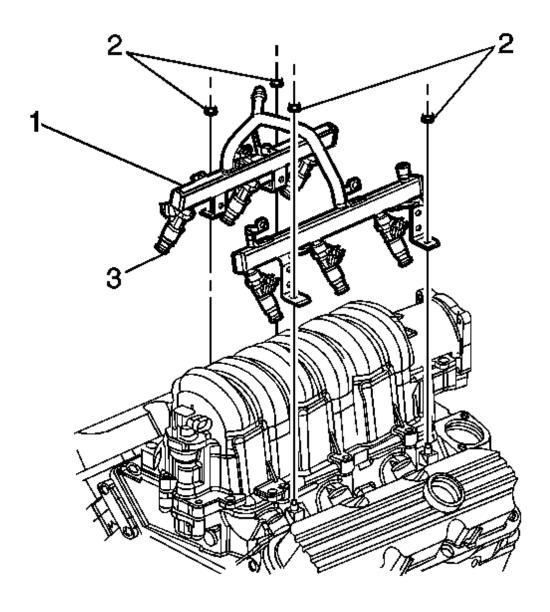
Fuel Rail Assembly & Fuel Injectors Courtesy of GENERAL MOTORS CORP.
